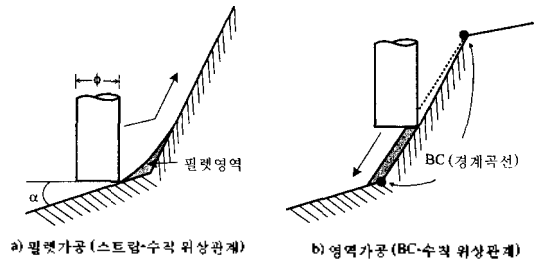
Flat-end mill (& round-end mill) UMOs.
